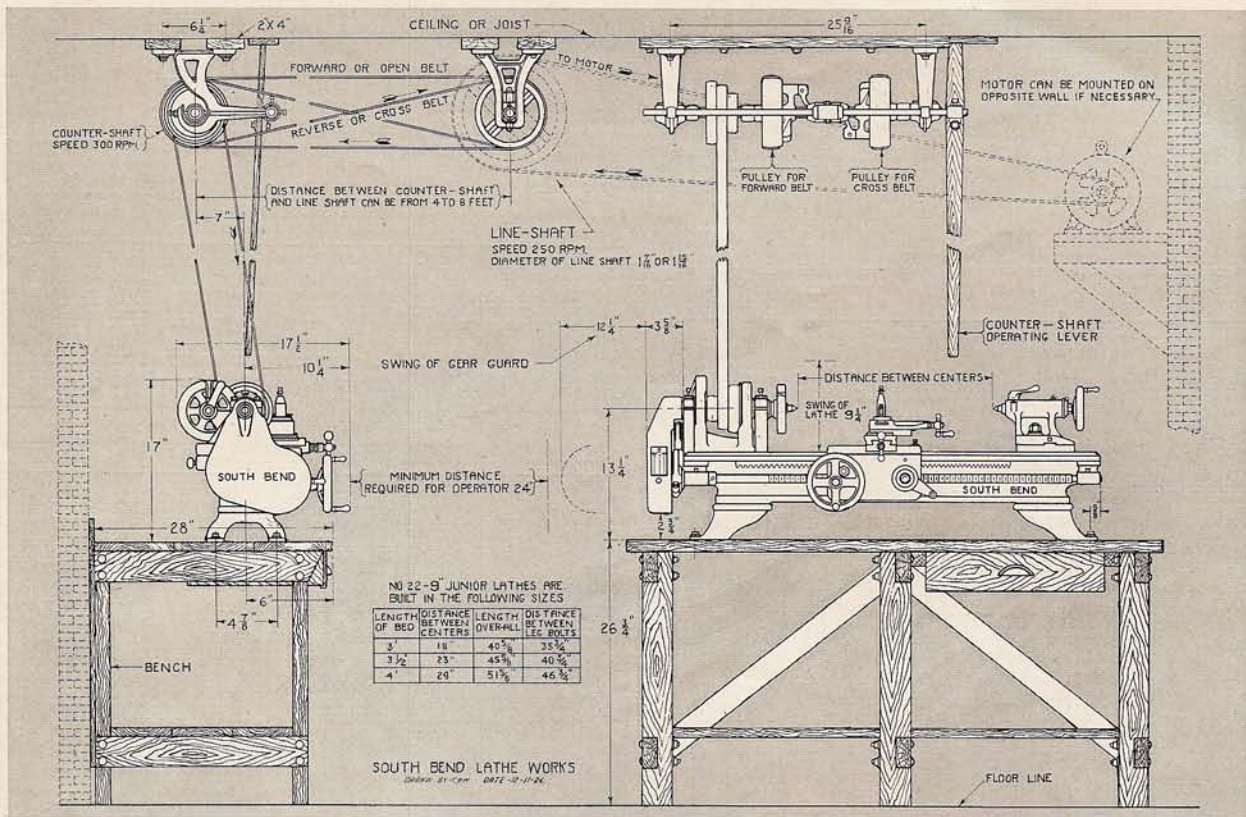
Erection Plan of No. 22-9-Inch Junior South Bend Bench Lathe
